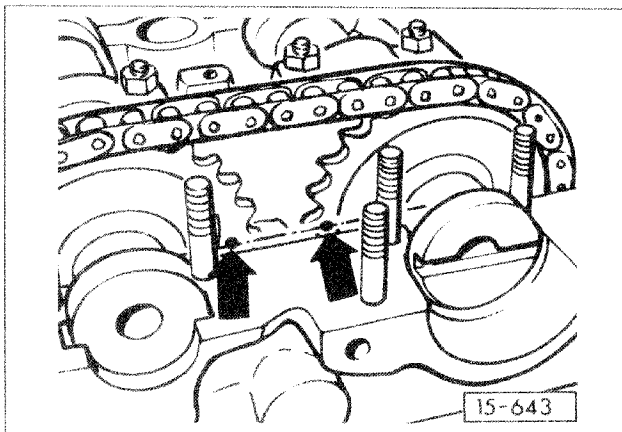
Camshaft drive chain sprockets correctly aligned in 16-valve cylinder head.
